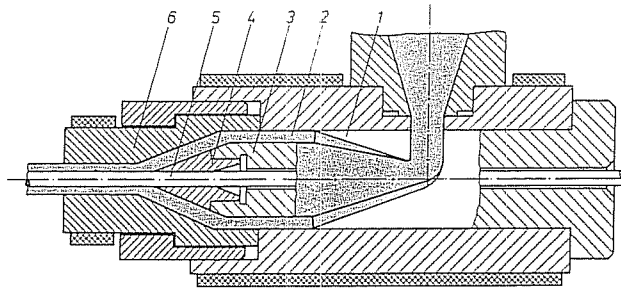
Basic design of a wire-coating die. 1 Manifold (here: a heart-shaped curve), 2 Annular slit, 3 Torpedo (hollow mandrel), 4 Mandrel orifice (torpedo tip guiding the wire), 5 Wire, 6 Die ring
